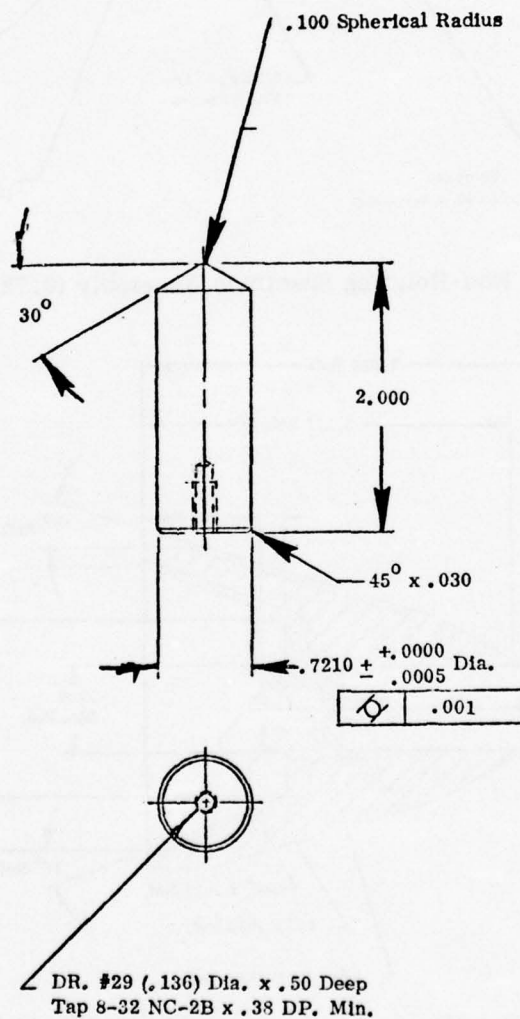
Cone-Cylinder Specimen (0.721-Inch Diameter)
